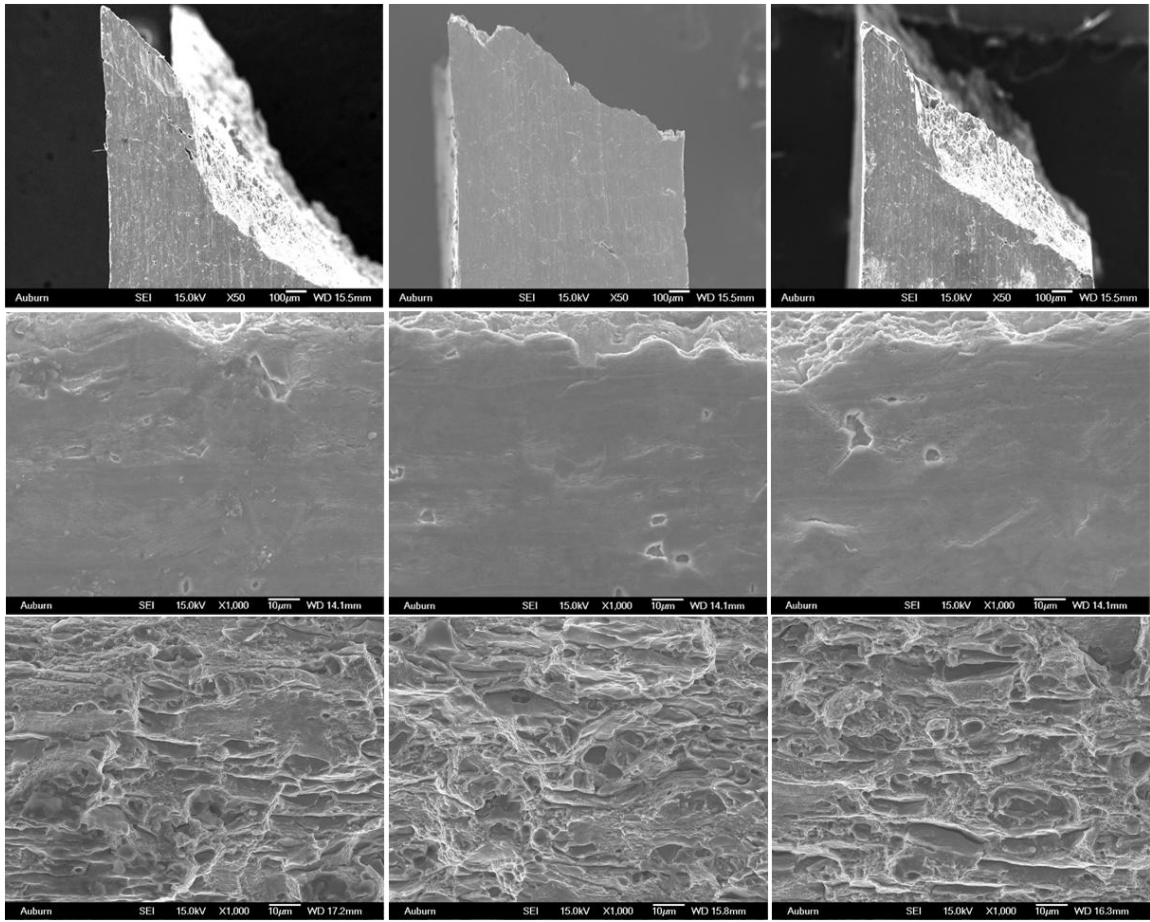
Secondary electron images of 7075-T6 aluminum alloy on the longitudinal direction after tensile testing: machined side (top), plan-edge (middle), and fracture surfaces (bottom). Left to right is the as-received, 25-cycle VHP exposure, and 168 hours of dip testing, respectively.
